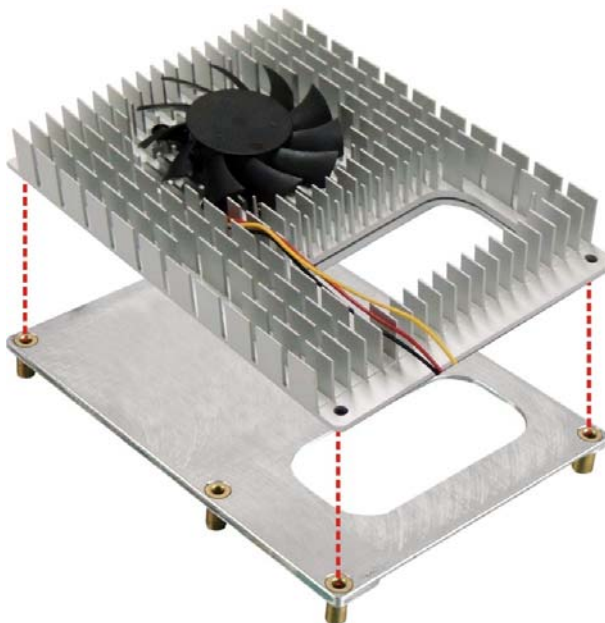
Attach the Cooling Kit to the Heatspreader Plate
